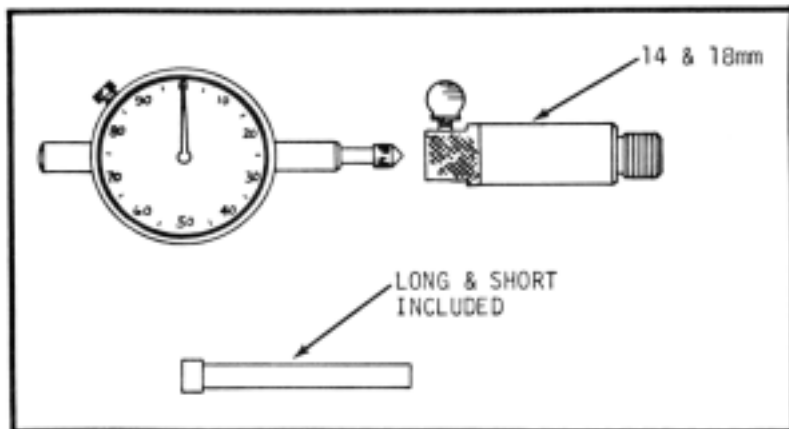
This dial indicator and adapter kit is available from Kohler.
